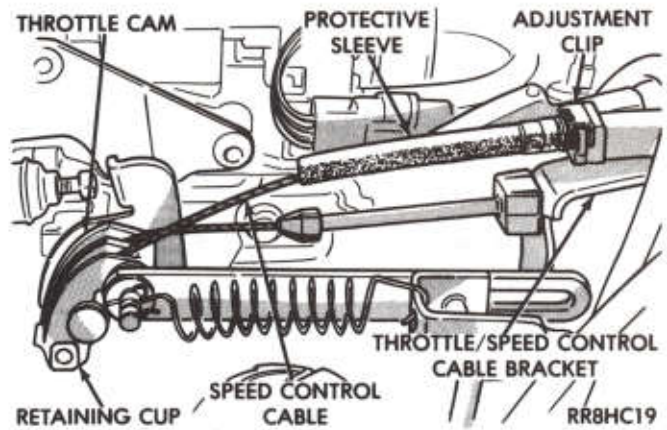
Speed Control Cable and Mounting Bracket (3.9L and 5.2L)
